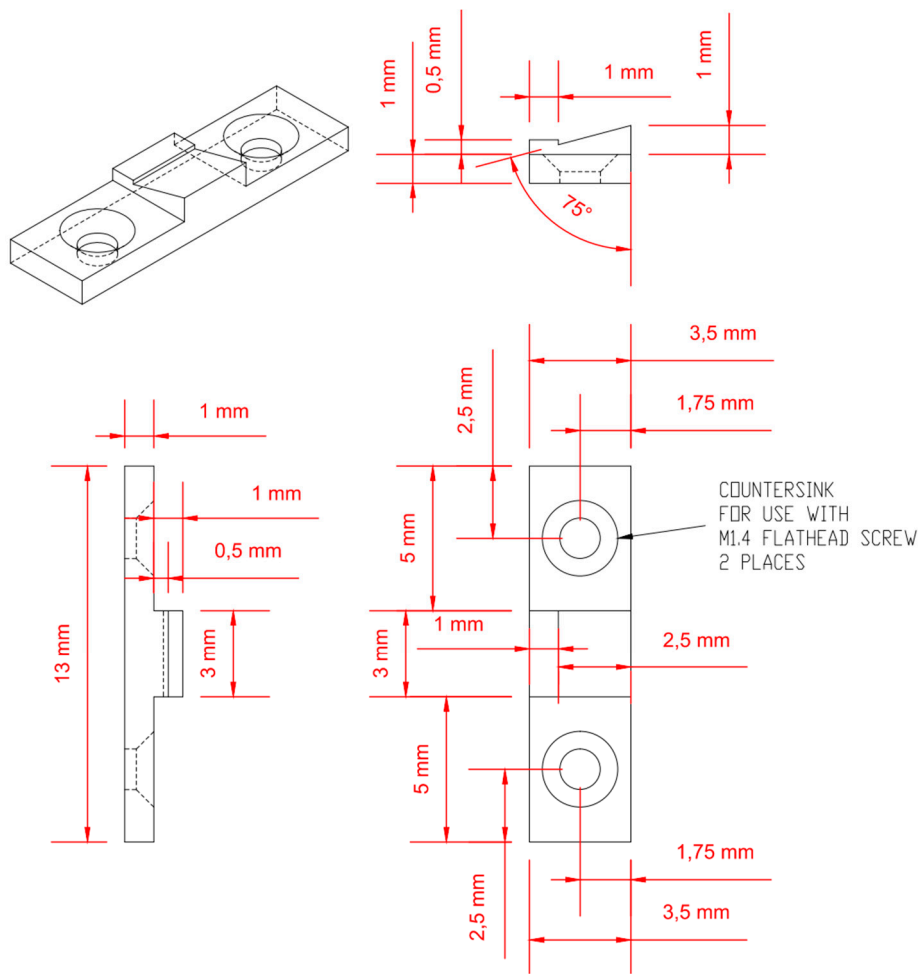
Detailed mechanical drawing of Part C4 from Figure S18.
